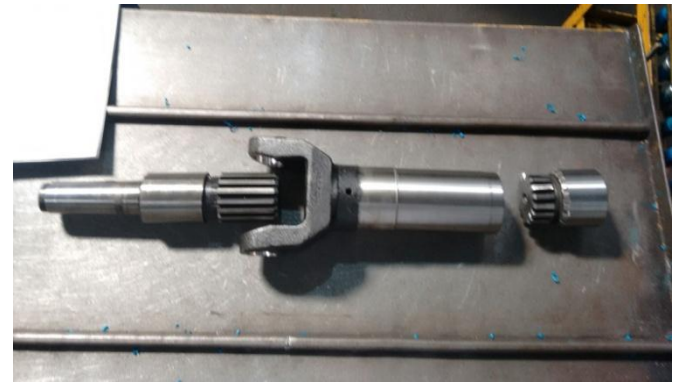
New Drive Centre Mandrel And Mandrel Block With Sleeve Yoke
